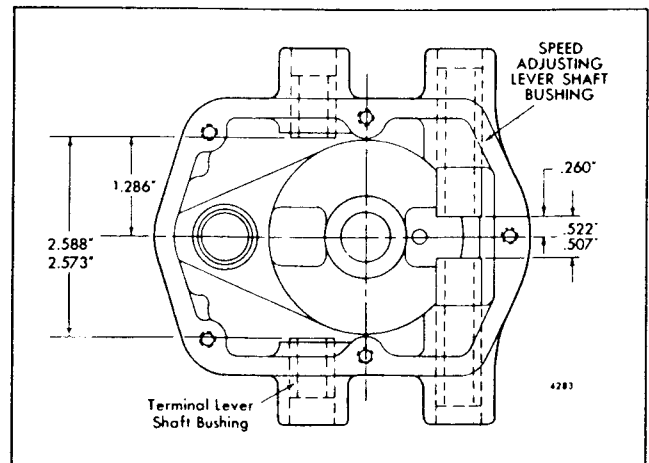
Location of Speed Adjusting Lever and Terminal Lever Shaft Bushings in Governor Housing
